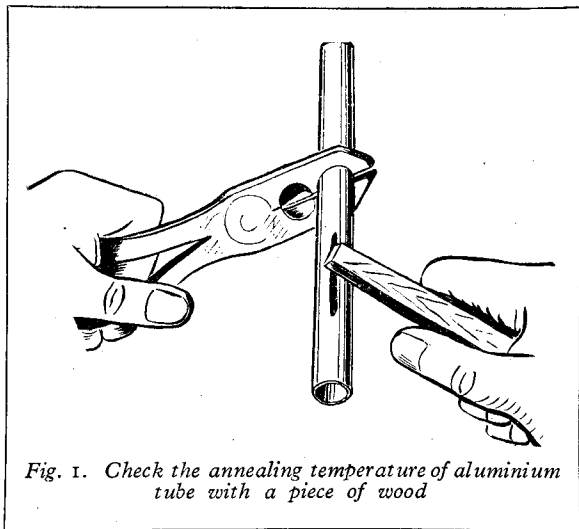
Check the annealing temperature of aluminium tube with a piece of wood
